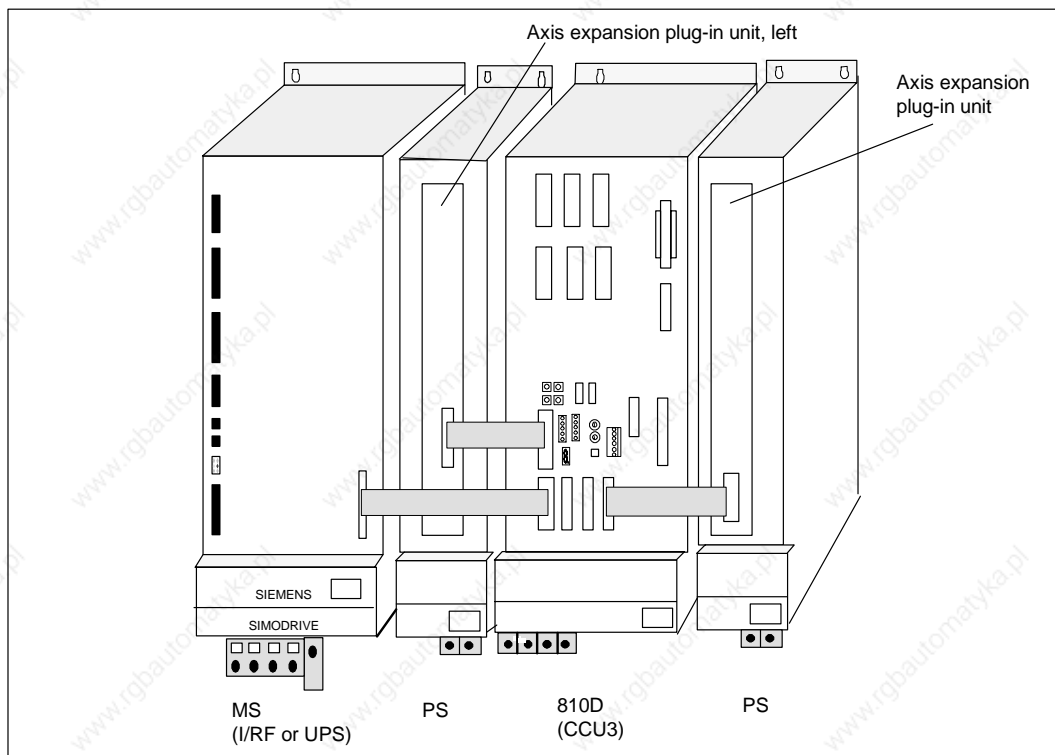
Left and right axis expansion plug-in unit for SINUMERIK 810D with SIMODRIVE 611 power modules
